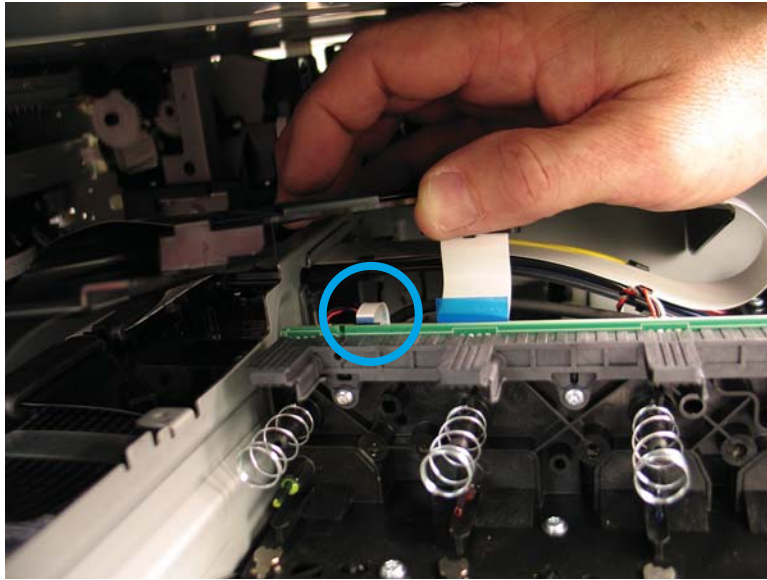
Remove the cartridge latch(es) and spring(s)
